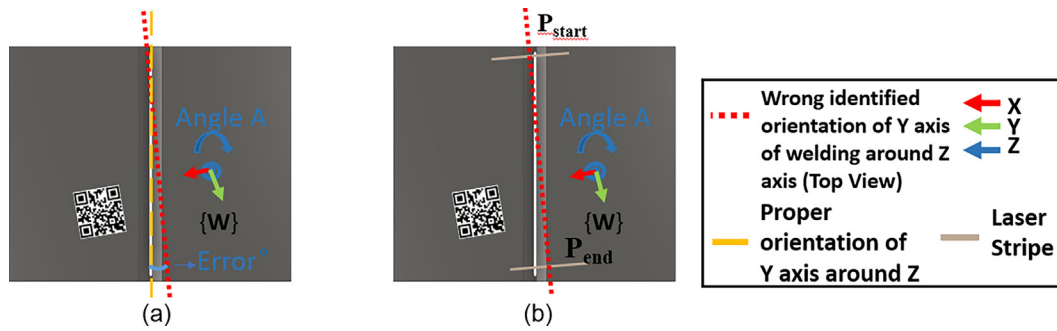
Misplacement of QR code affect the angle A of torch relative to Z-axis of {W}: (a) The wrong axis of welding forms angle A + error° around the desired axis of welding, (b) P_{start} and P_{end} are recorded while the laser scanner moves the TCP to the middle of the seam and X, Y coordinates of the TCP are recorded on these points.
